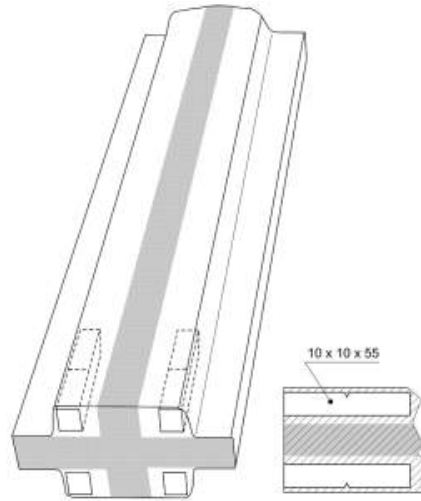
Cutting of the specimens from the pure weld metal test blocks. Dimensions are given in mm.
